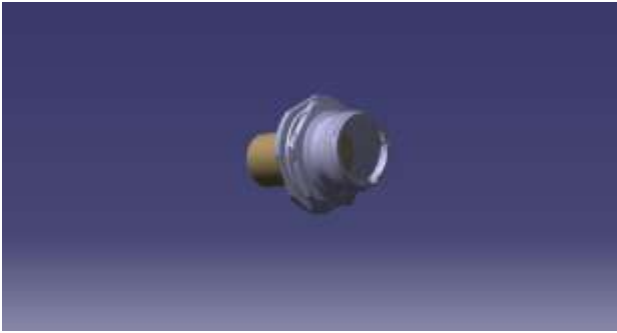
Dis-assembled cylindrical leakage fixture
